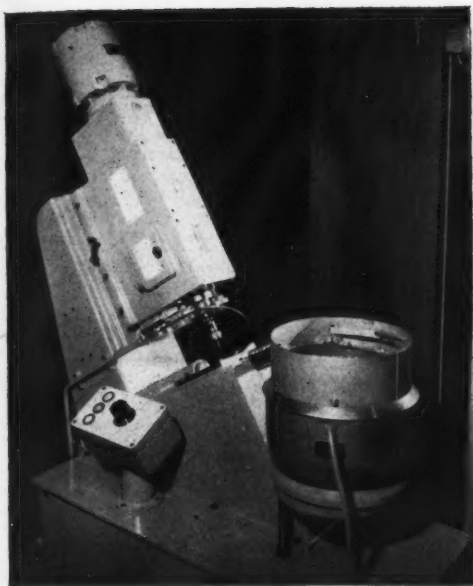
On this GAI 8 automatic tapping machine, the spindle is driven at 710 r.p.m. by a 1-h.p. motor, and reversed by adjustable stops and switches inside the head
